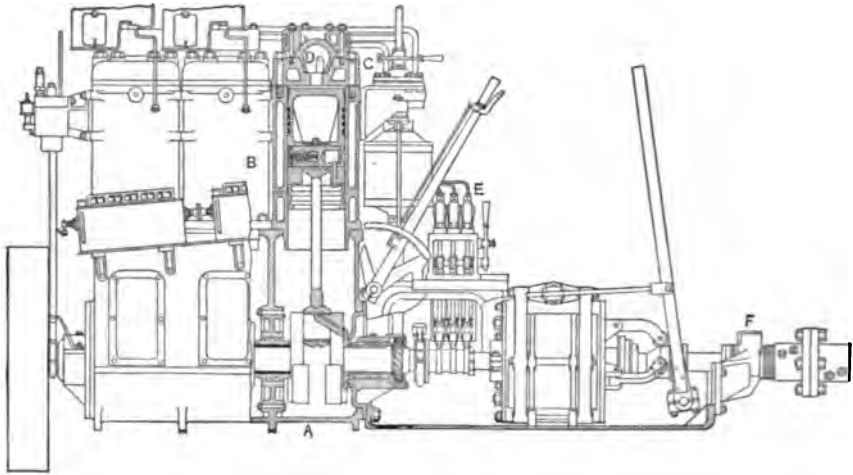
Fairbanks Morse two-cycle type. (A) Engine frame. (B) Cylinder. (C) Cylinder head. (D) Vaporizer. (E) Fuel-supply pumps. (F) Thrust block.
